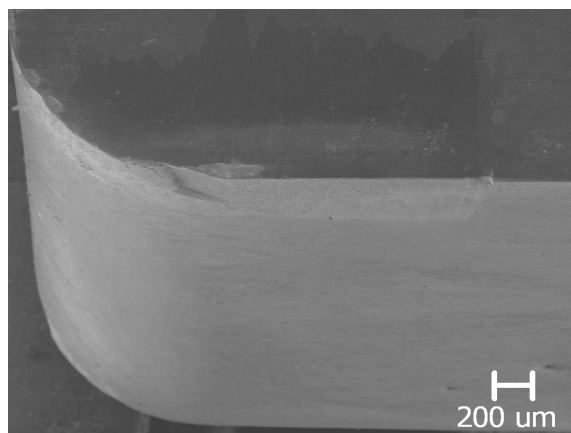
Worn coated carbide insert after machining AISI 1047 steel under dry machining.
